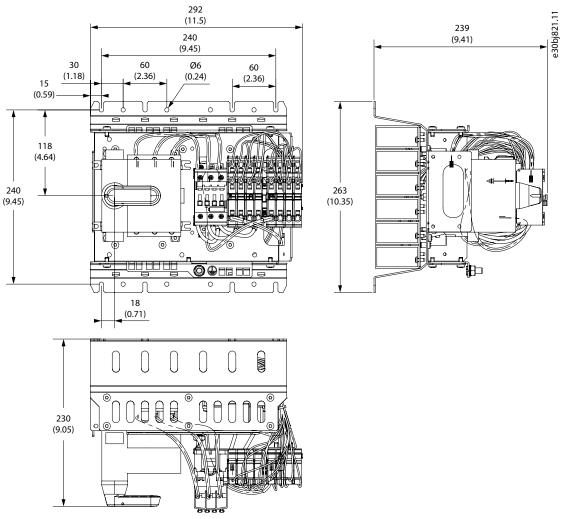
Dimensions of the Pre-charging Unit in mm (in), IEC
